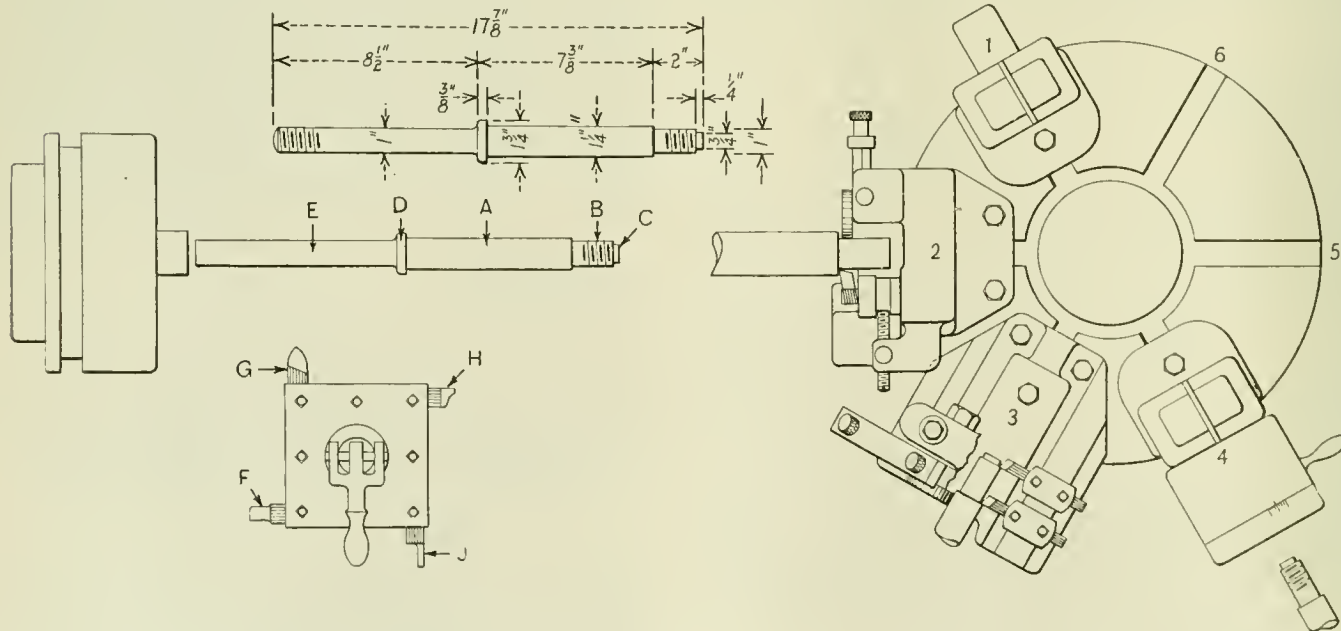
Tooling of Universal Turret Lathe for First Operation on Emergency Valve Stem
